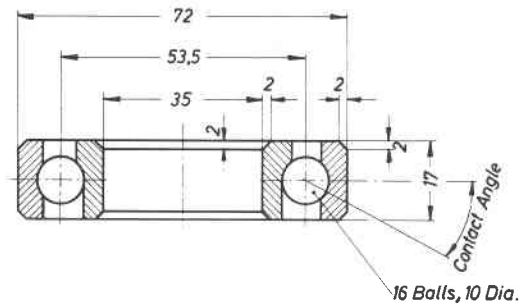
Cageless Test Bearing, Dimensions in Millimeters
